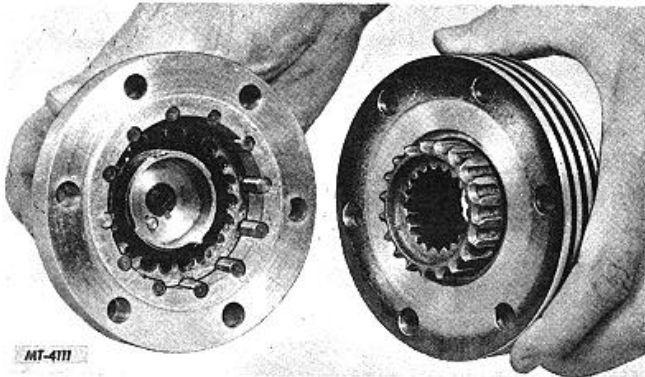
Clutch Body and Hub Body Properly Assembled (Manual Type)
